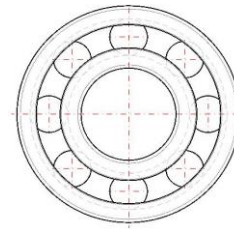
CAD design of SKF 6203 ball bearing. © Copyright. SKF®
